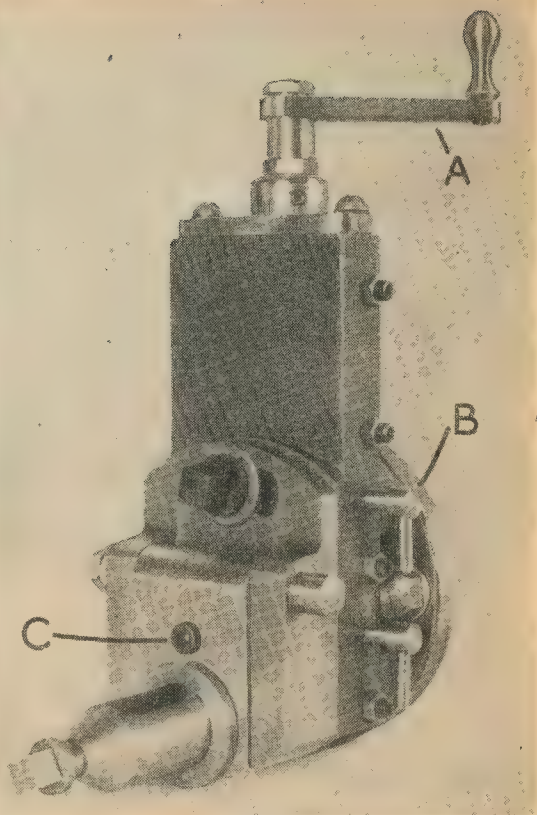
The shaping machine tool-slide. A—the new, long feed handle. B—the slide locking-screws. C—the clapper-box fixing-screw
